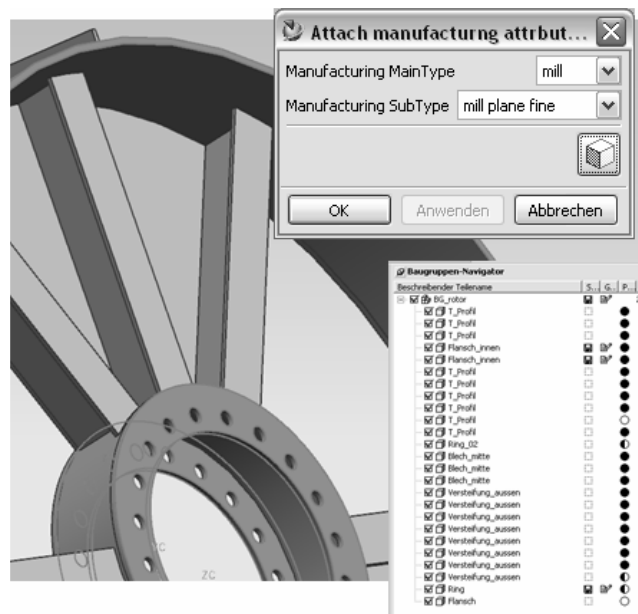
Assignment of technology information within an assembly on the initial CAD model
